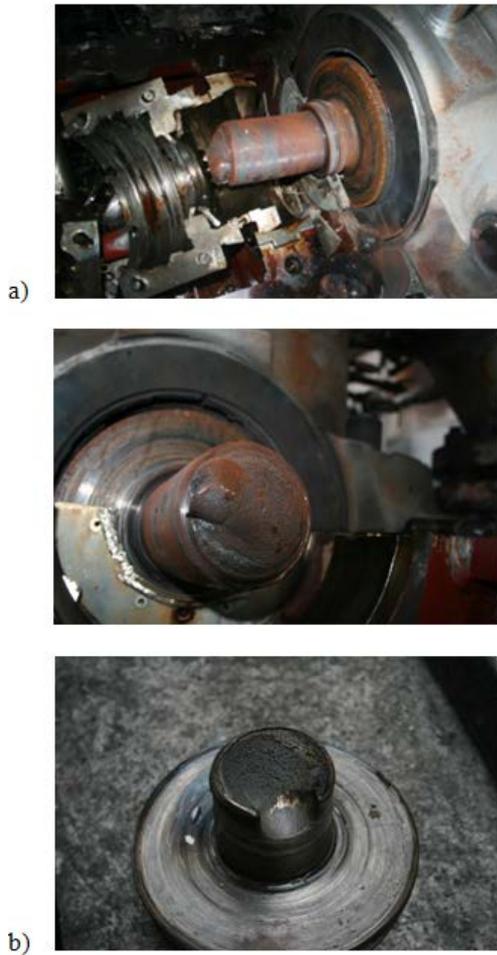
Damage of turbine shaft on the side of axial bearing (cross-section II-II)
